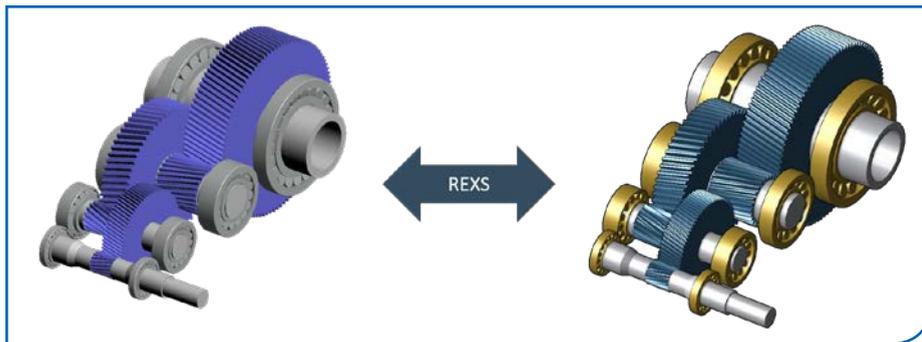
Three-stage parallel shaft gearbox from SEW in *Bearinx* and *FVA Workbench*.
